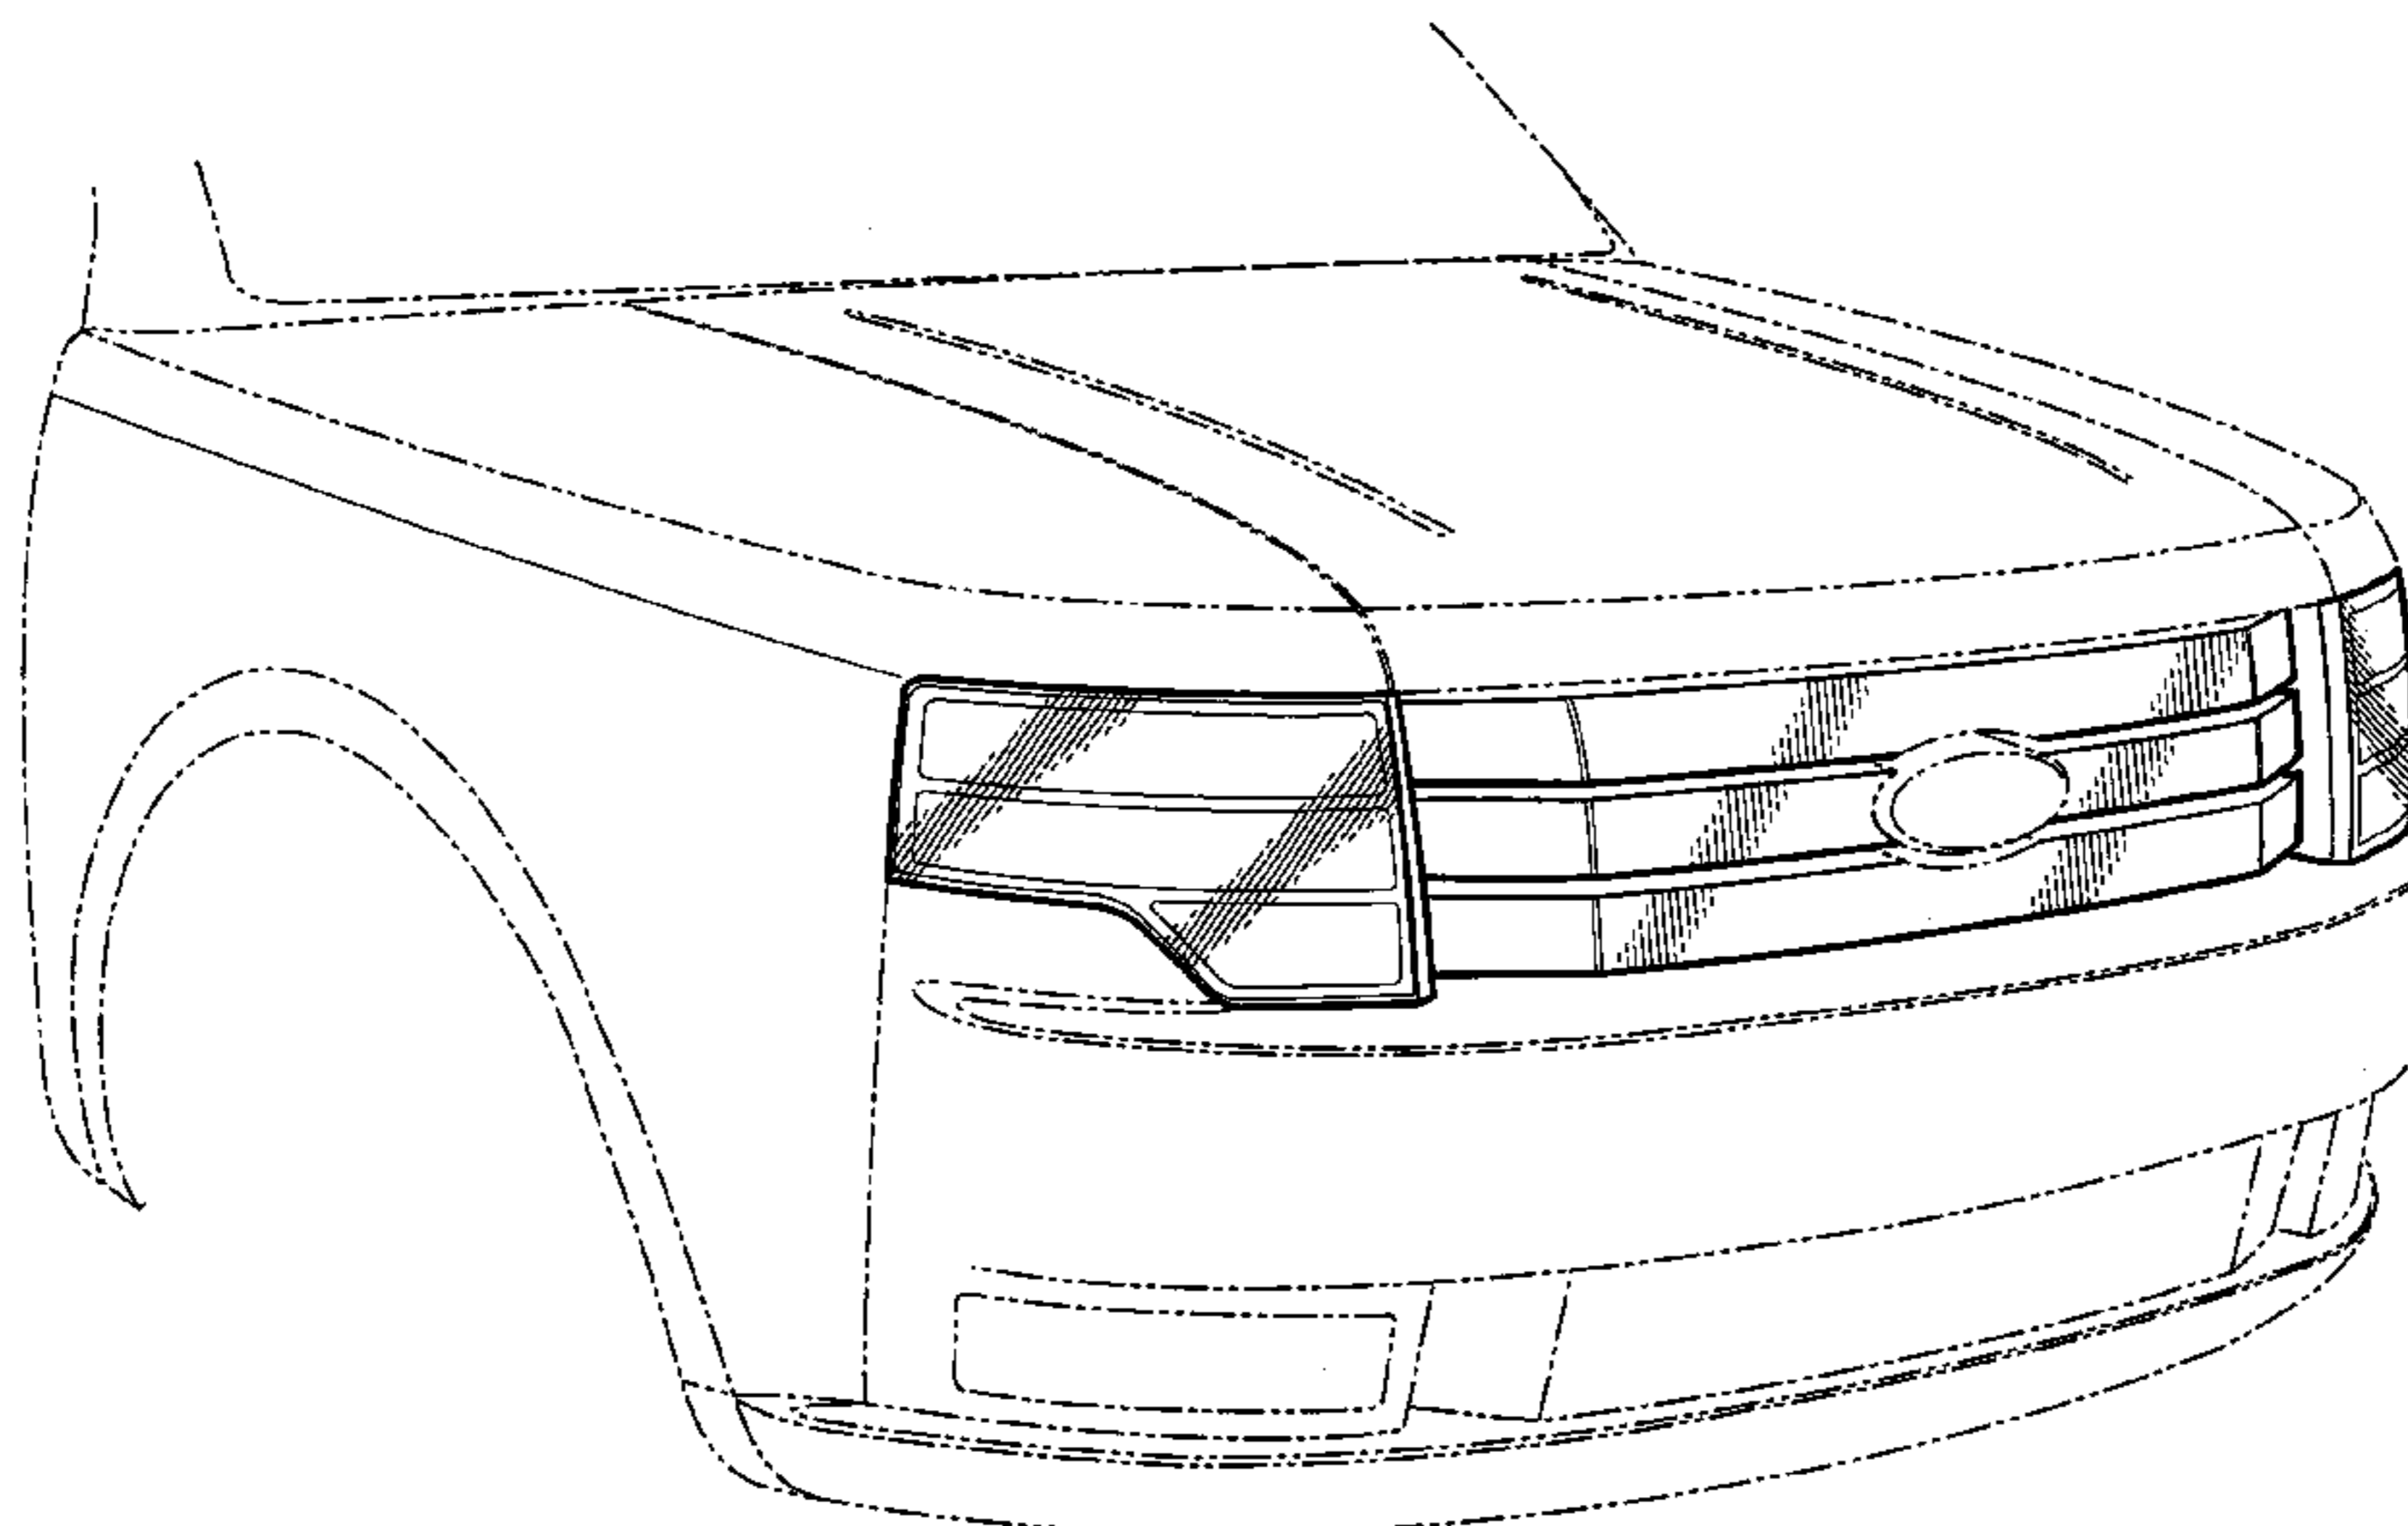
is a perspective view of the automotive front end of FIG. 4;
